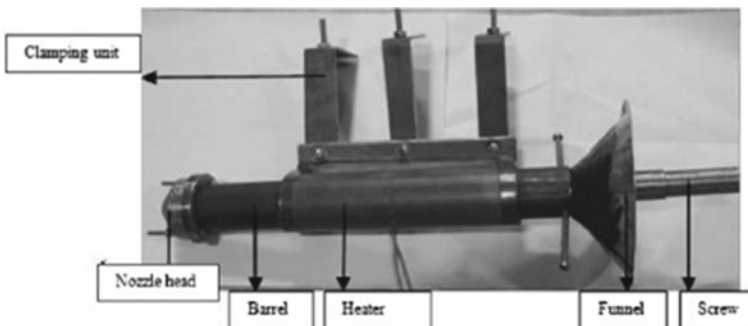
Deign of Extruder head for CNC-assisted additive manufacturing [18]
